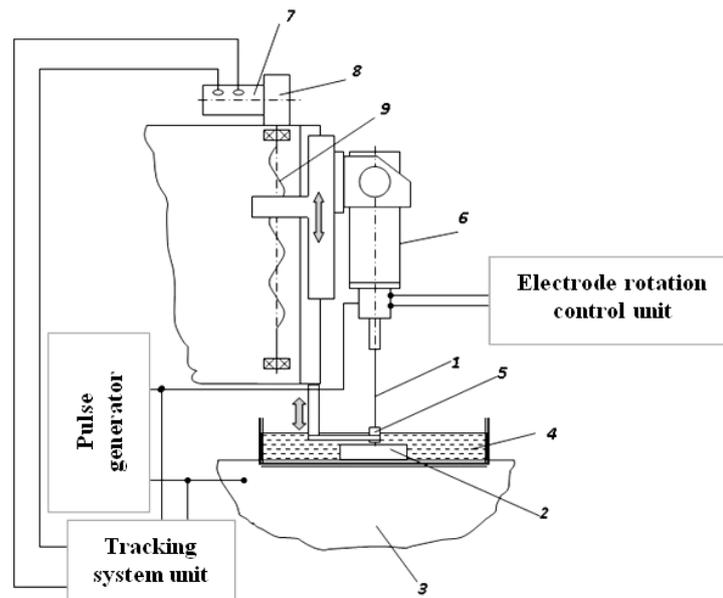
Diagram of a module for electrical discharge machining with a rotating non-profiled electrode tool: 1 – wire electrode tool; 2 – processed product; 3 – table; 4 – bath; 5 – conductor sleeve; 6 – head; 7 – electric motor of the tracking system; 8 – reducer; 9 – lead screw
